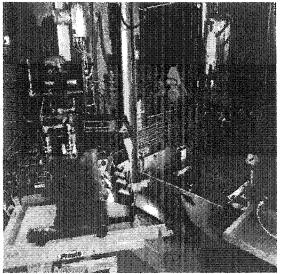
Masco Super Center Reconfigurable Machines [94]
